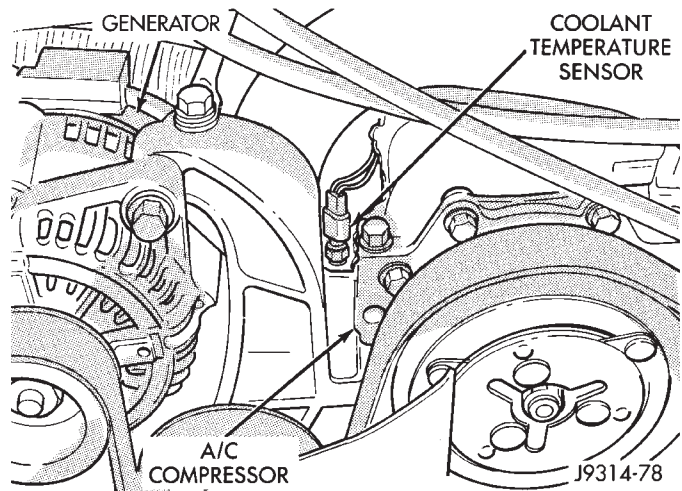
Engine Coolant Temperature Sensor—5.2L Engines
